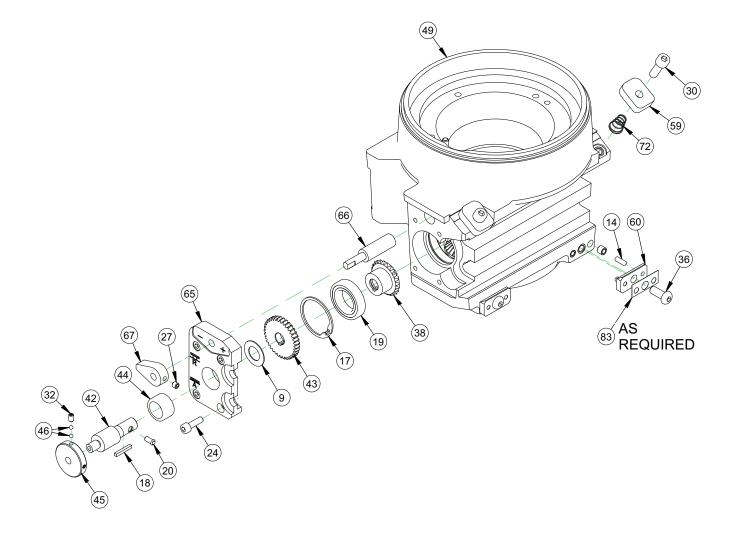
FF5300 ASSEMBLY 2 (P/N 89900)
